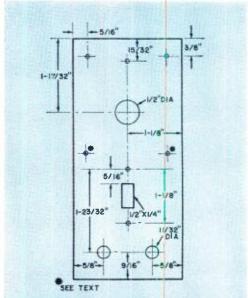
Dimension details shown in drawing are for machining front of the utility box.
